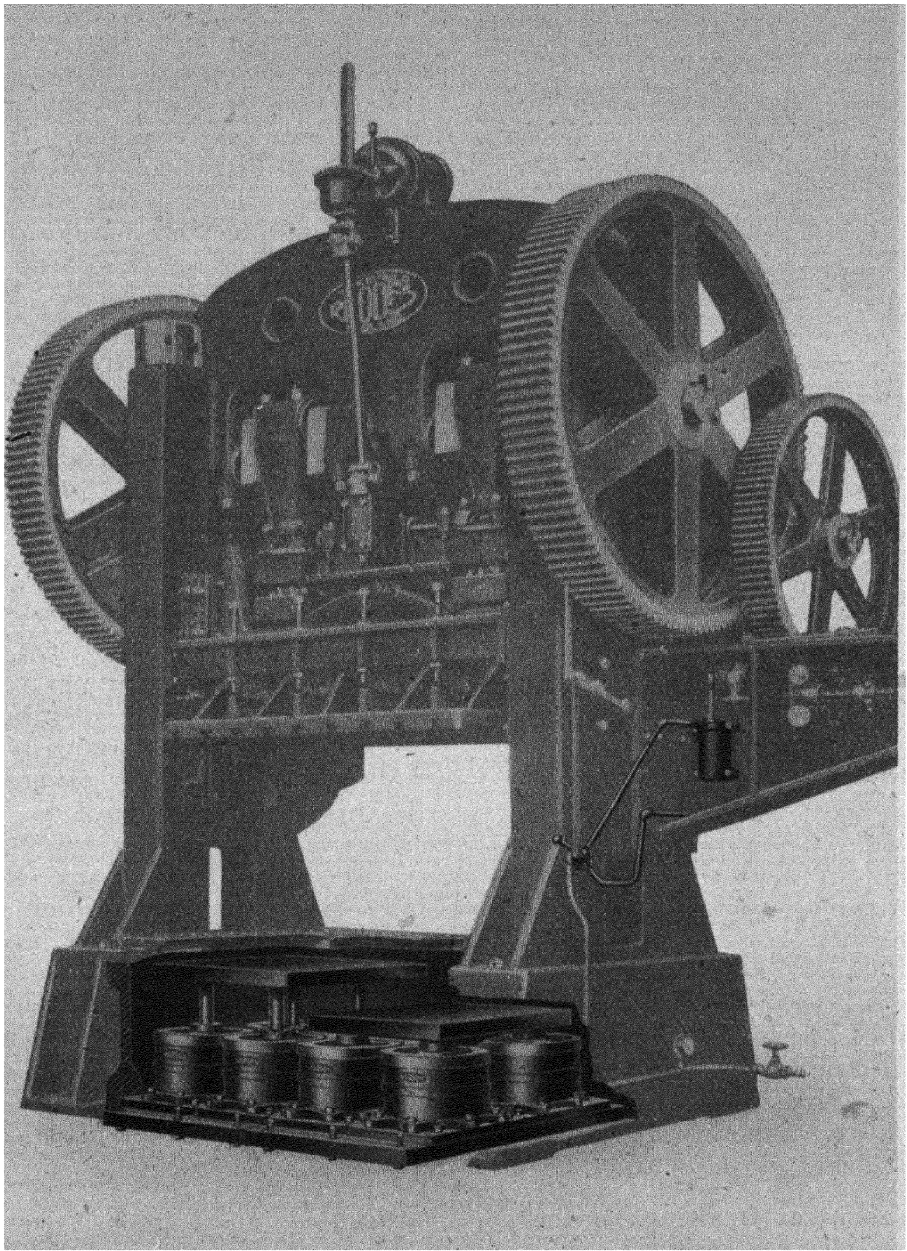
A 300-TON DOUBLE-CRANK DOUBLE-SIDED RHODES PRESS WITH DIE-CUSHION EQUIPMENT, THE PRESSURE BEING APPLIED BY THE PNEUMATIC LAYOUT SHOWN IN FIG. 10
